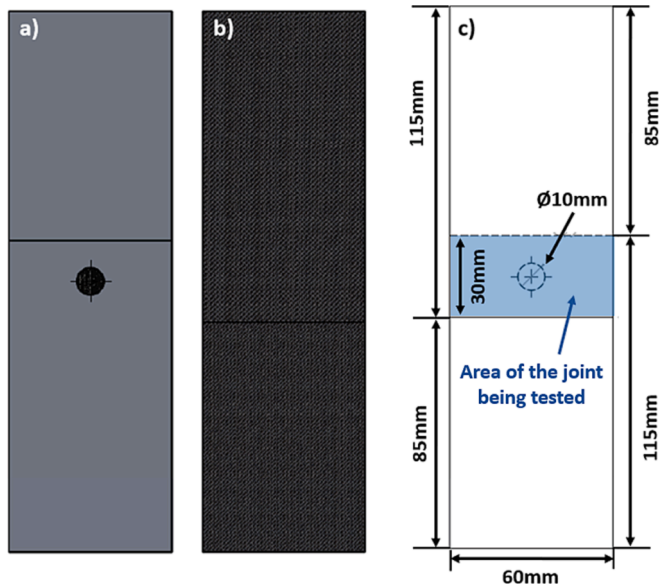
Single Lap Shear specimens with one substrate being aluminium and the other being CFRP. a) Al side of the specimen, b) CFRP side of the specimen, and c) dimensioned drawing of the specimen. (For interpretation of the references to colour in this figure legend, the reader is referred to the web version of this article.)
